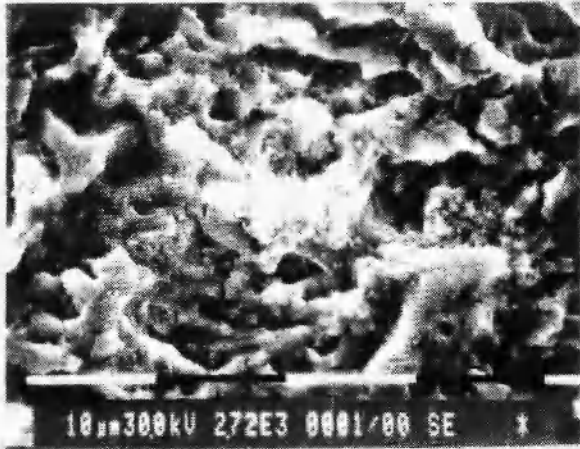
SEM fractograph of B1 specimens (weld metal) in threshold region.
